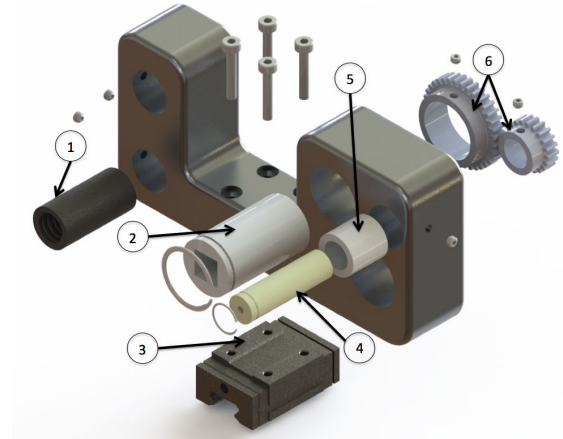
Design of a single carrier: ① Lead nut ② Square bore sleeve ③ Bearing block ④ Tube holder ⑤ Sleeve bearing ⑥ Gear train.
